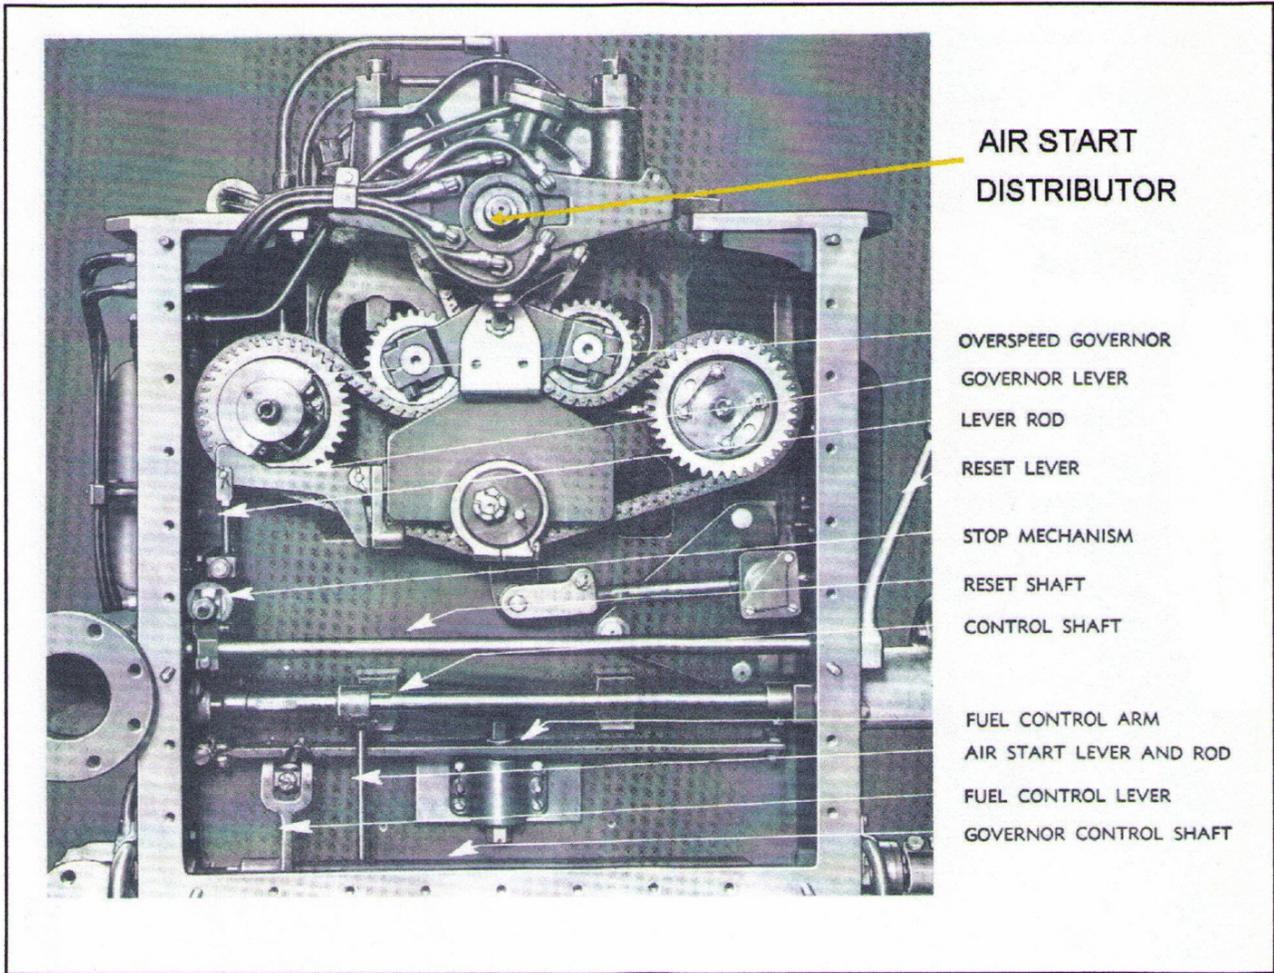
Chain Type Camshaft Drive Mechanism - OP
